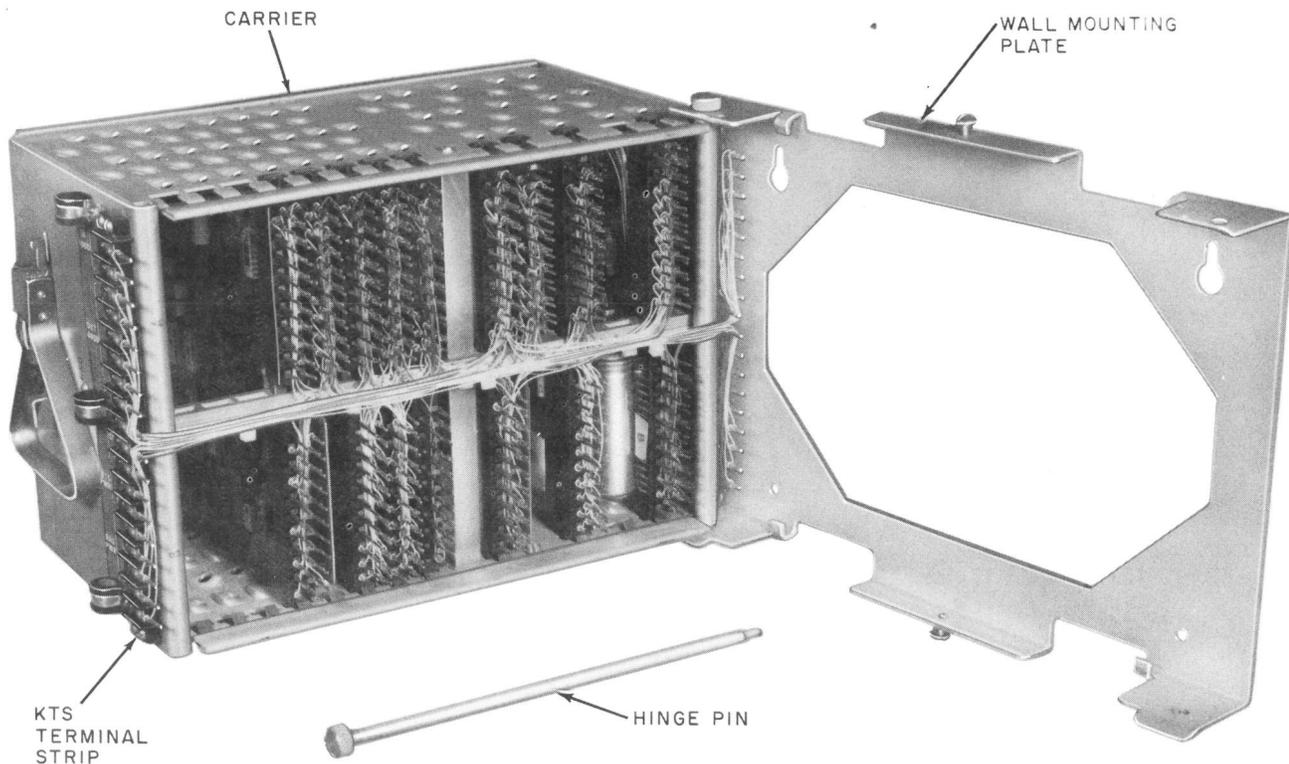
Remote Access Unit—89C Apparatus Mounting—Hinge Pin Removed—Right Side View
